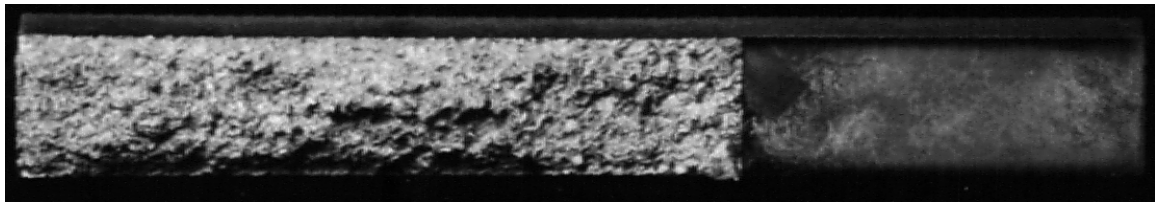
Fracture surface of side-grooved Timetal 5111 specimen loaded quasistatically.
